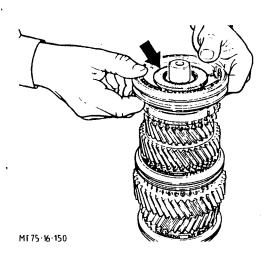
Short collar of 3rd/4th gear synchronizer unit.
